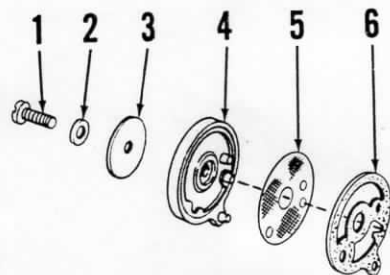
When installing filter on 1965 and later models, make certain that parts are installed as shown.
